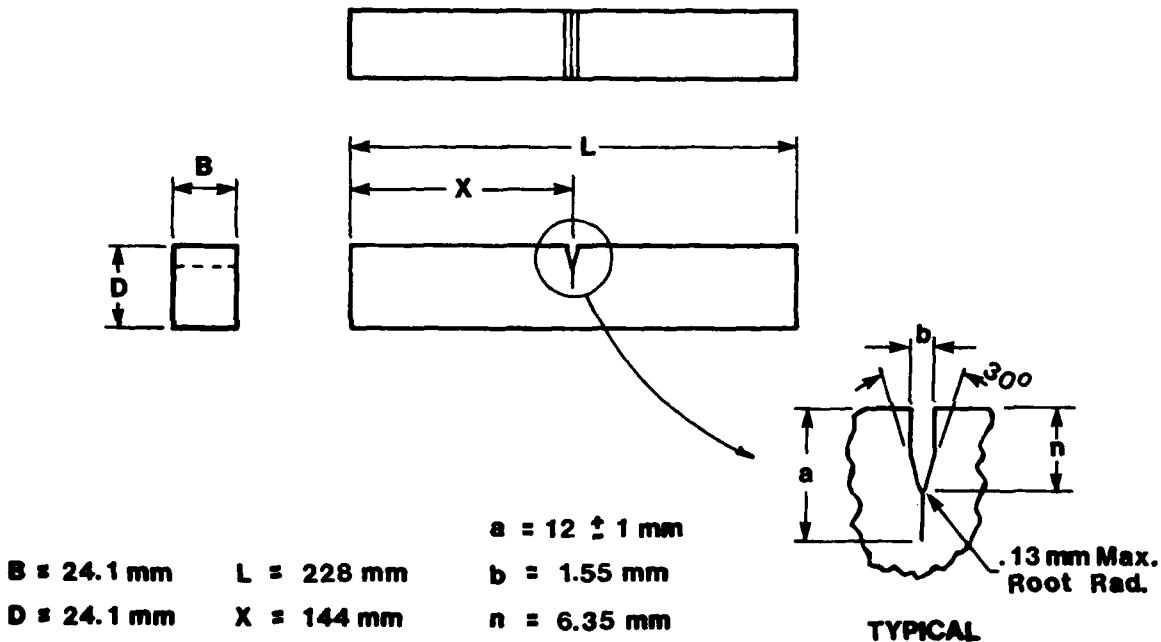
Precracked cantilever beam specimen used for environmental crack propagation tests.
